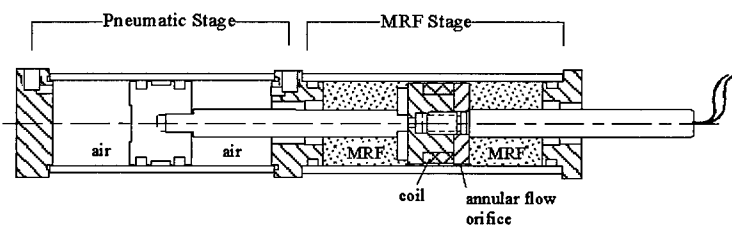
Linear pneumatic actuator with tandem MR fluid linear brake.
